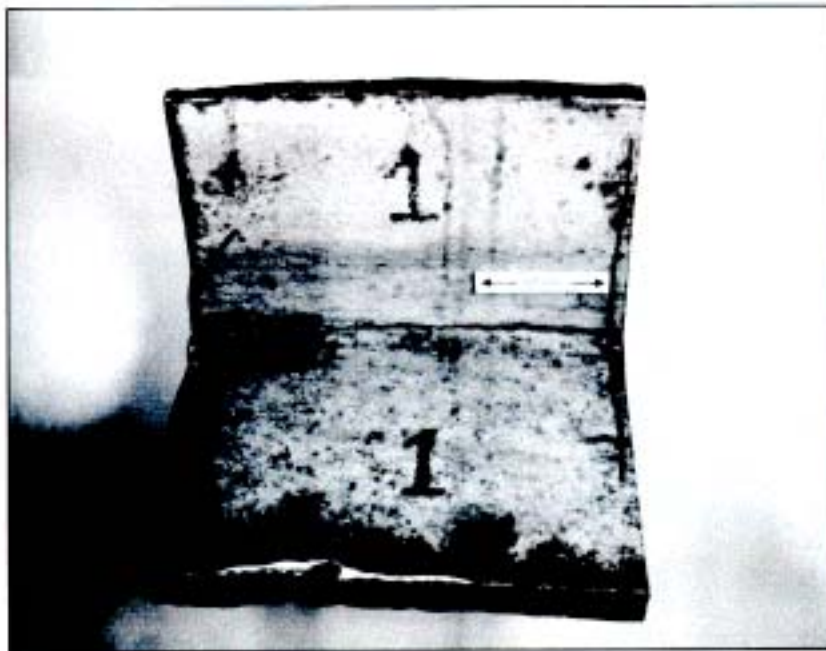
Section of shell to bottom tube plate weld removed from the port economiser
